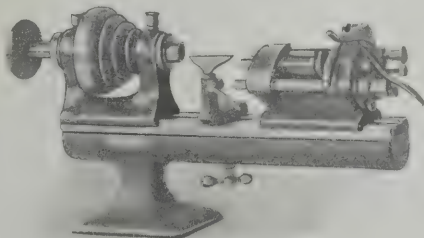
Precision Lathe with Three-spindle Tumble Tailstock
